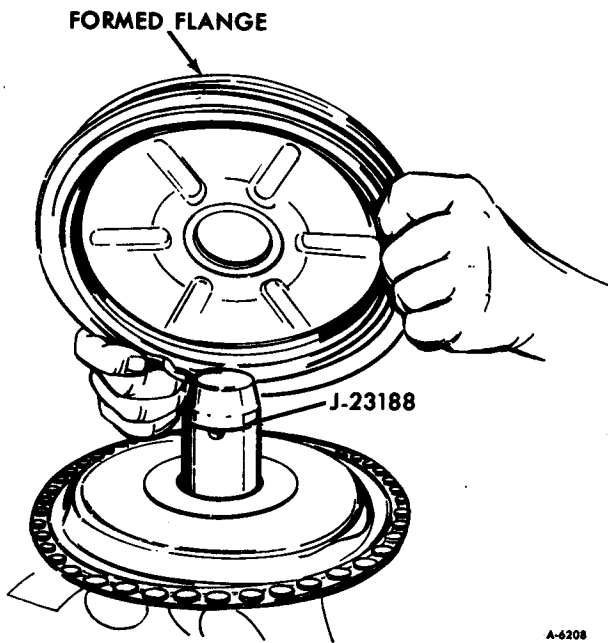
Positioning Housing Divider Over Secondary Bearing Protector Tool J-23188
